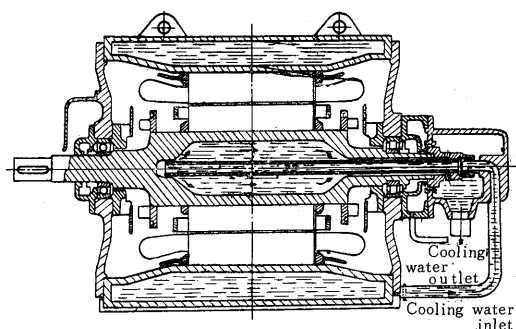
Section view of direct water cooled flame-proof induction motor, Model DWPRK
